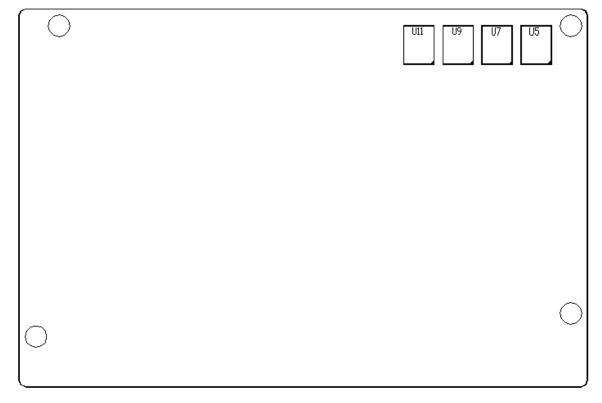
Jumpers and Connectors Location- Board Bottom
